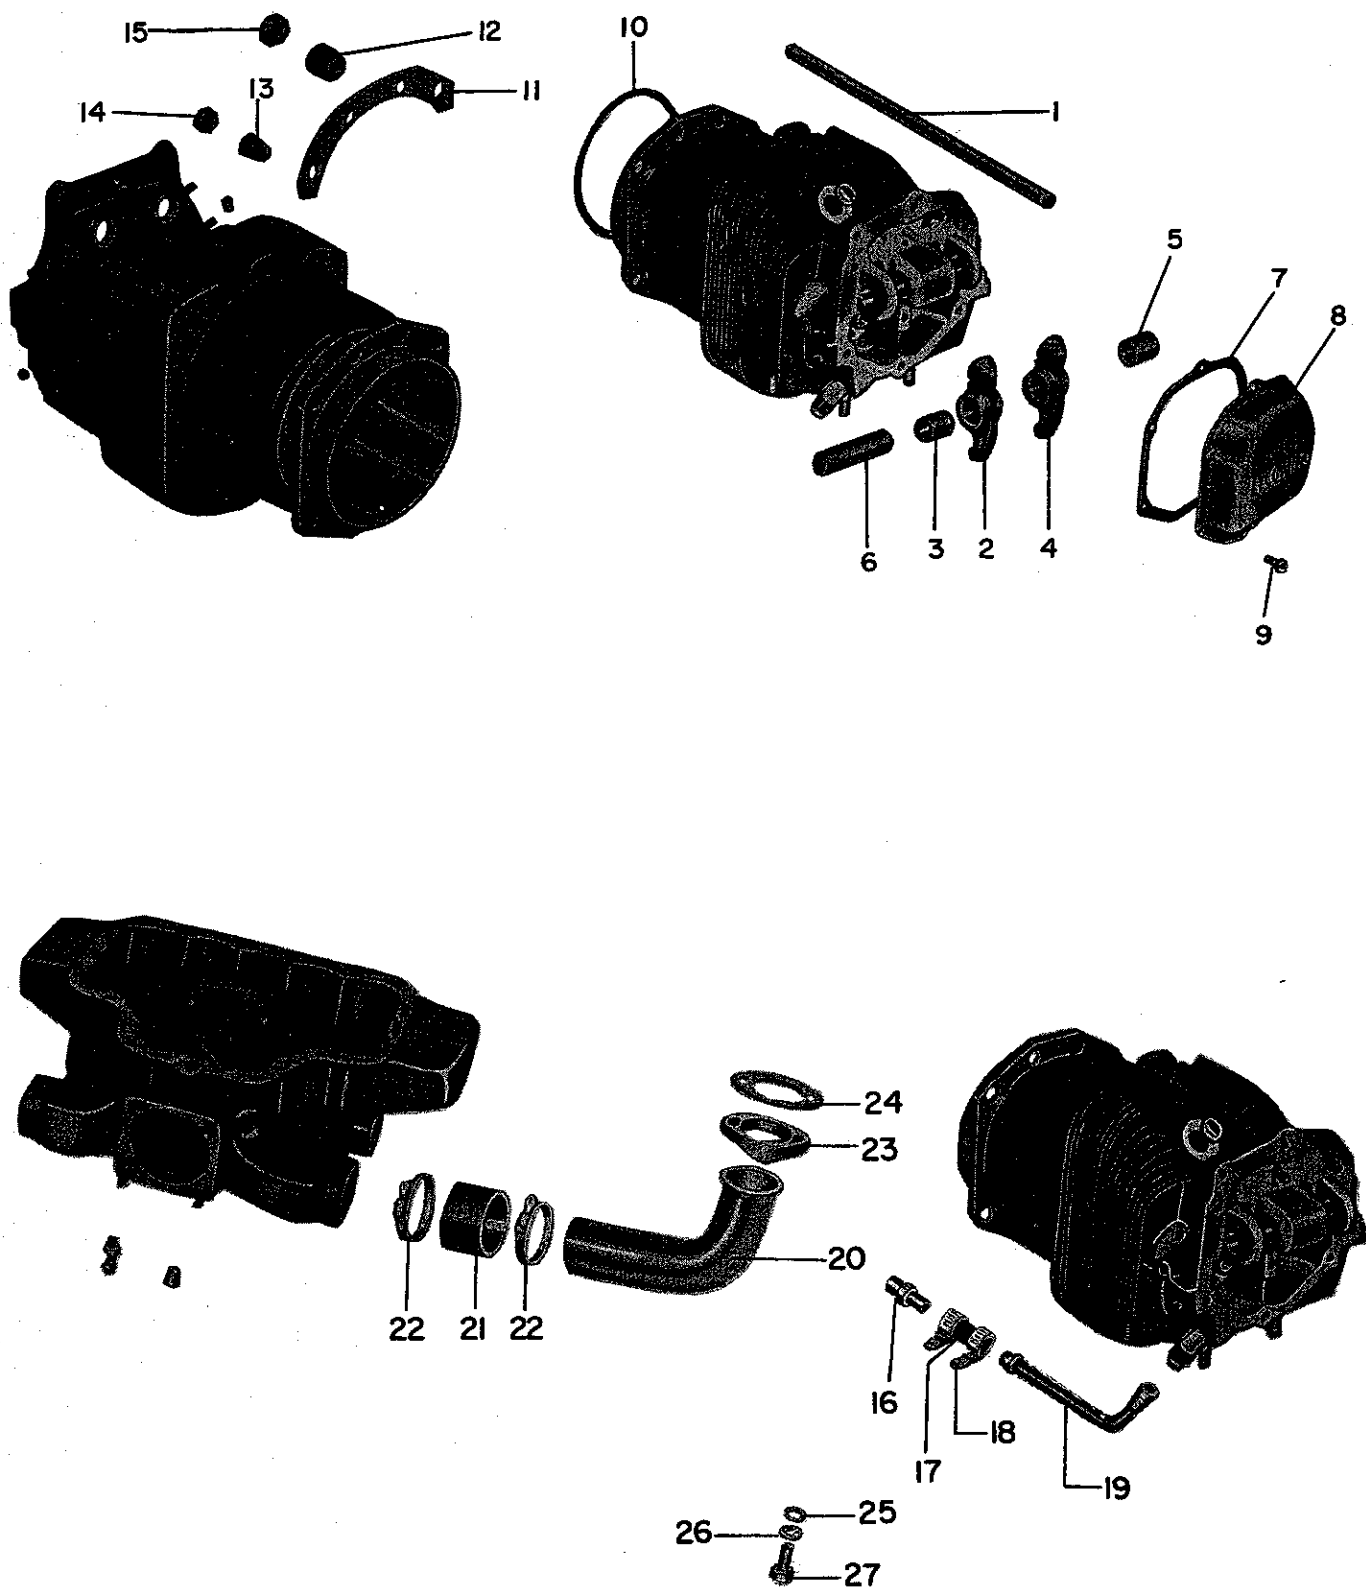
Rockers, Push Rods, Intake Pipes and Oil Drain Tubes
